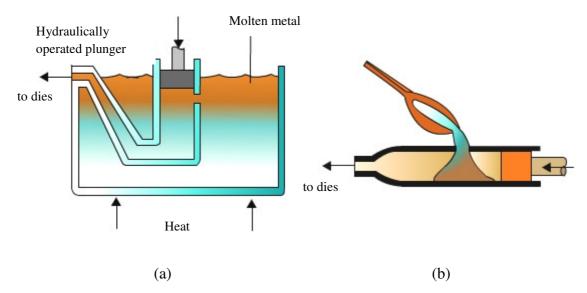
Schematic layout of the high-pressure die-casting process (a) hot chamber and (b) cold chamber
